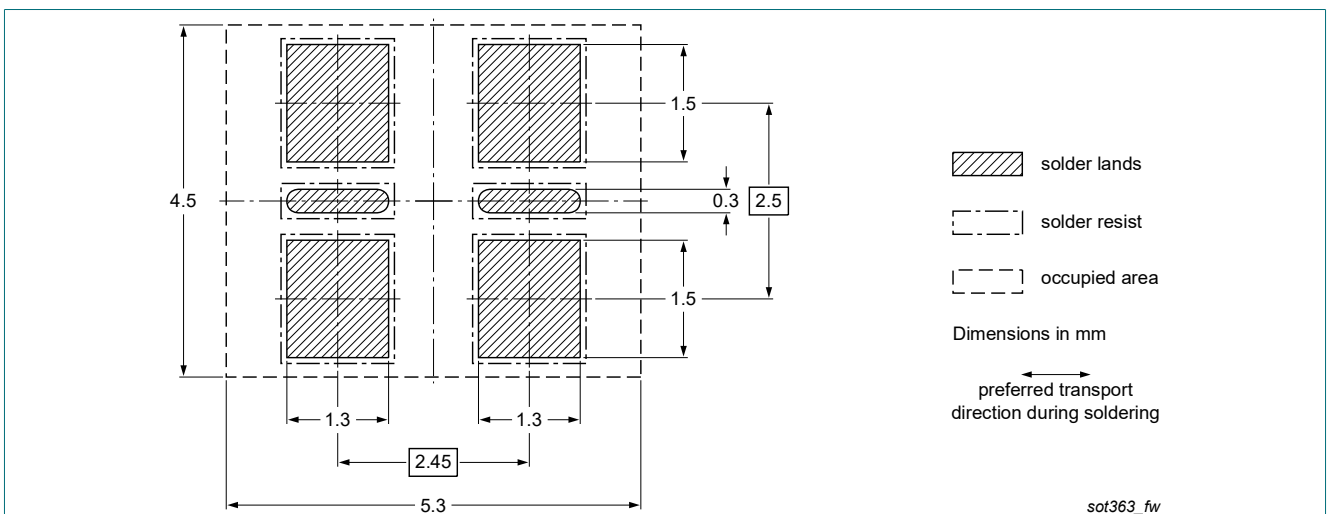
Wave soldering footprint SOT363 (SC-88)
